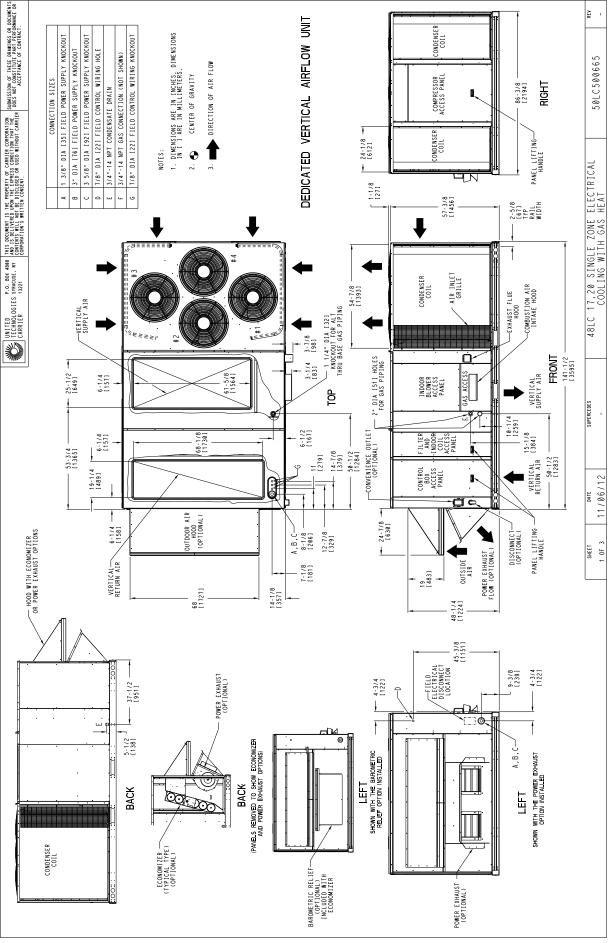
Unit Dimensional Drawing - 17 and 20 Size Units, Sheet 1 of 3
